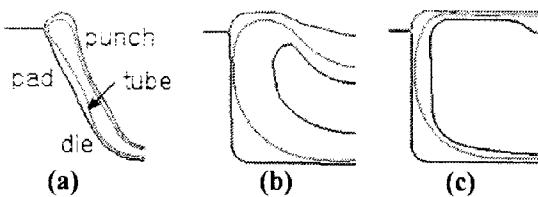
Shape of cross sections with the modified design: at (a) E-E'; (b) F-F'; (c) G-G'
